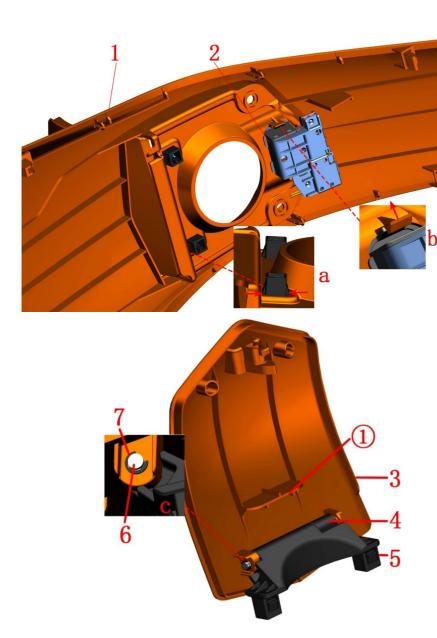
FUEL TANK		Fuel tank middle cover, Fuel tank cover, Fuel tank	СНК	(0)
